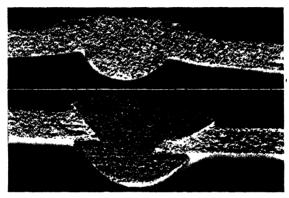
A macrograph (4X) of two butt welds. The top weld used as filler metal, the same metal as the base metal; while the bottom weld used a commercial filler rod as filler metal. Note the penetration and fusion
